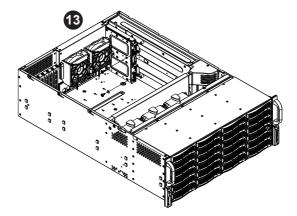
Installing the Hard Drive Assembly into the Chassis
